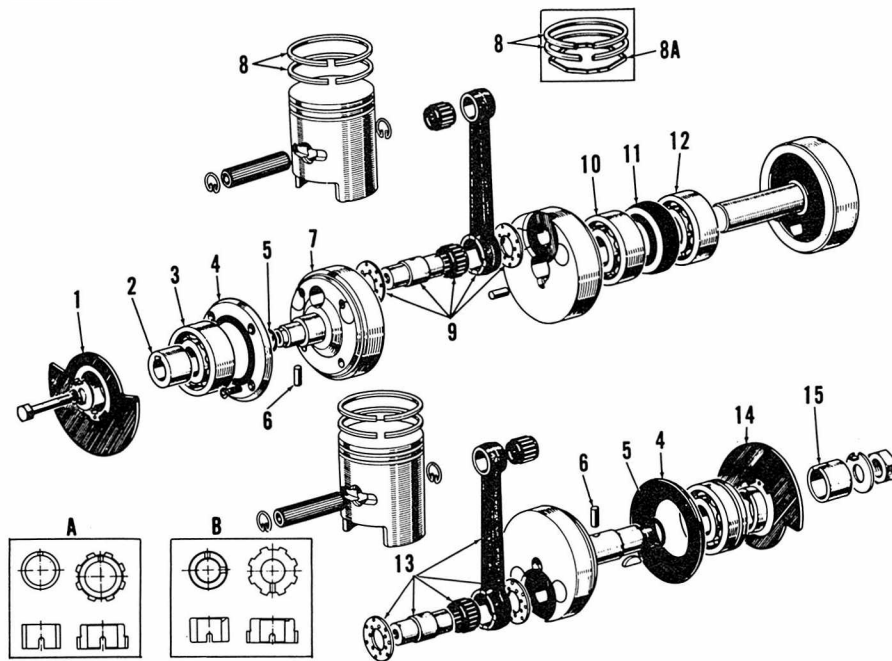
Exploded view of A7 crankshaft assembly. Expander ring (8A) and oil receiver (4) are not used on A1 models. Replacement ring sets equipped with expander ring (8A) may be installed on early A7 pistons that originally did not have expander. Differences in late and early; left (A) and right (B) rotary valve collars may be seen.
